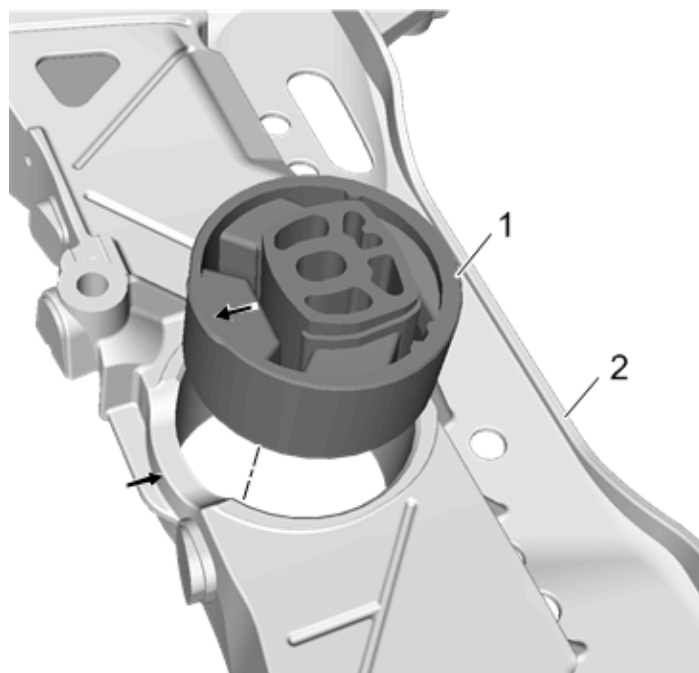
Transmission Rear Mount, Drivetrain And Front Suspension Cradle
